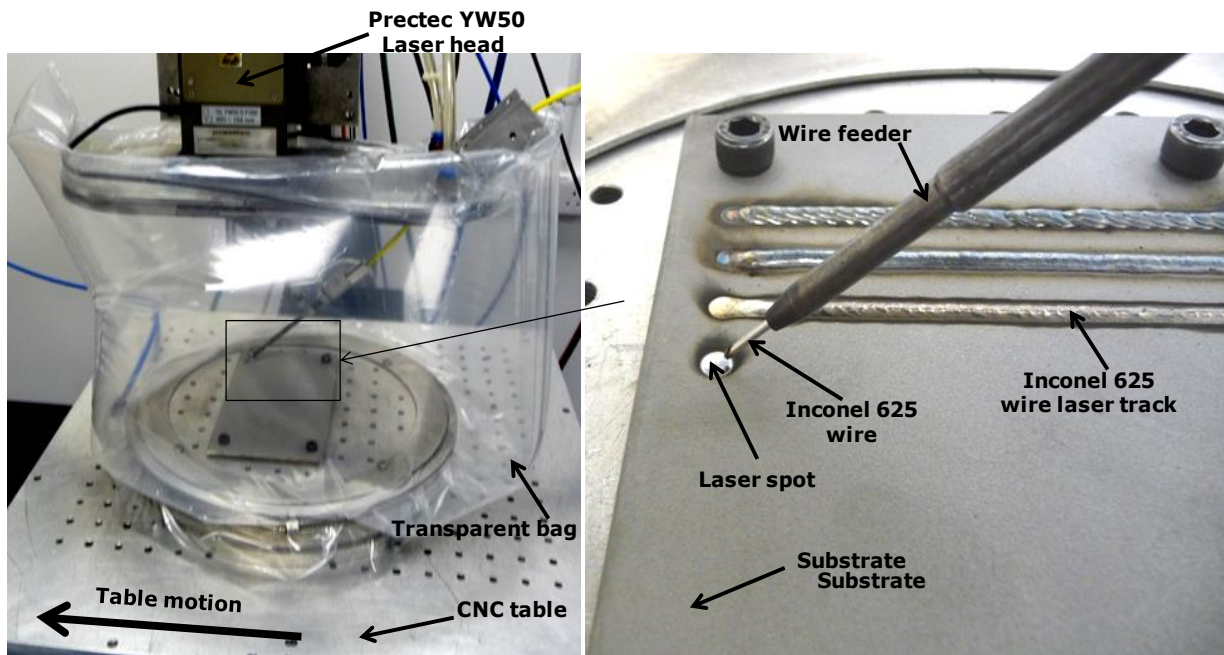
Experimental set-up for Inconel 625 wire laser deposition
